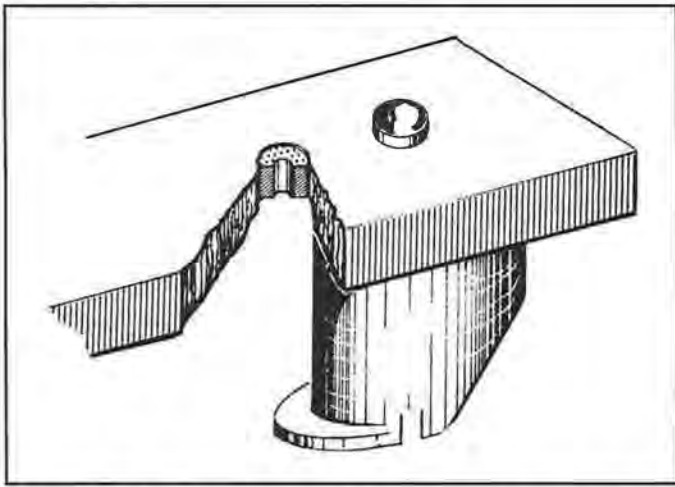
Preparing old pin for repair, top is filed flush with the regulator and hole is drilled in center of stump of old pin.
